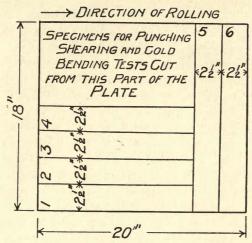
ZINC PLATE SHOWING LOCATION OF SPECIMENS.
